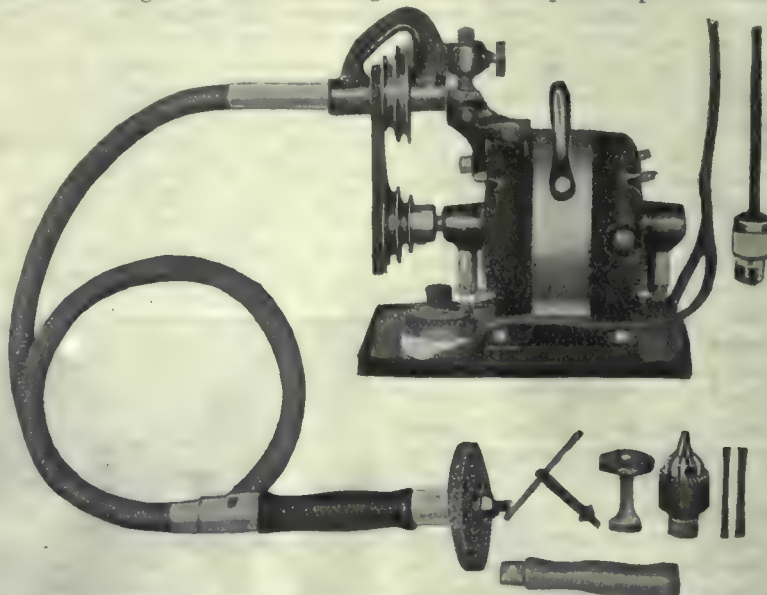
FLEXIBLE SHAFT OUTFIT FOR LIGHT GRINDING, POLISHING AND DRILLING.
